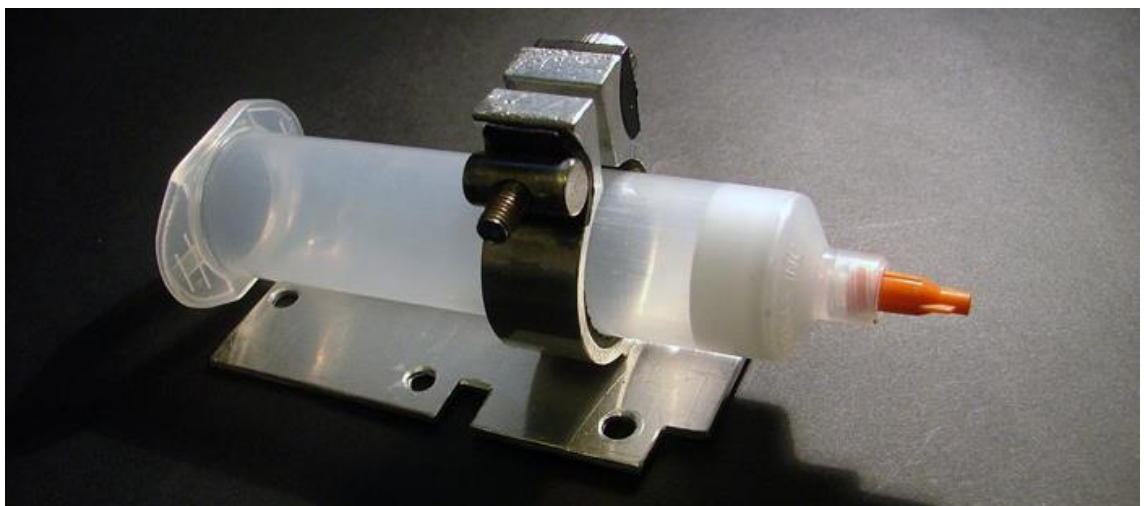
, Syringe barrel mounting plate for Modela CNC machine. figure by author
